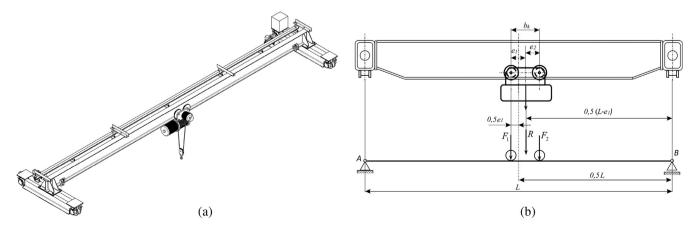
Single-girder bridge crane (a) appearance and elements of the structure and (b) load of the main girder of the crane.
